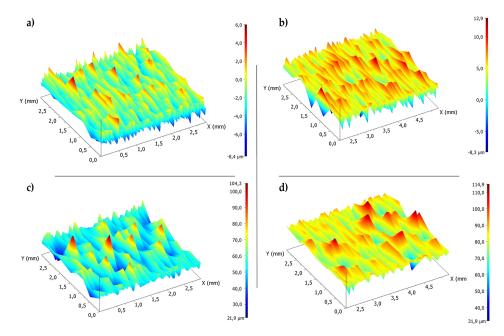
Topography of the tested surfaces of the molding insert and polypropylene moldings obtained using contact-type device: (a) surface of the EDM A molding cavity, (b) surface of the EDM A molding, (c) surface of the EDM A molding cavity, (d) surface of the EDM C molding
